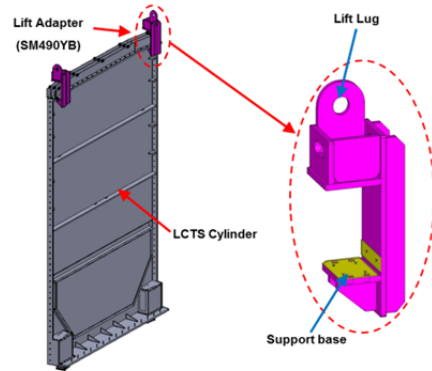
Configuration of Lower Cryostat Thermal Shield Cylinder and Lift Adaptor
